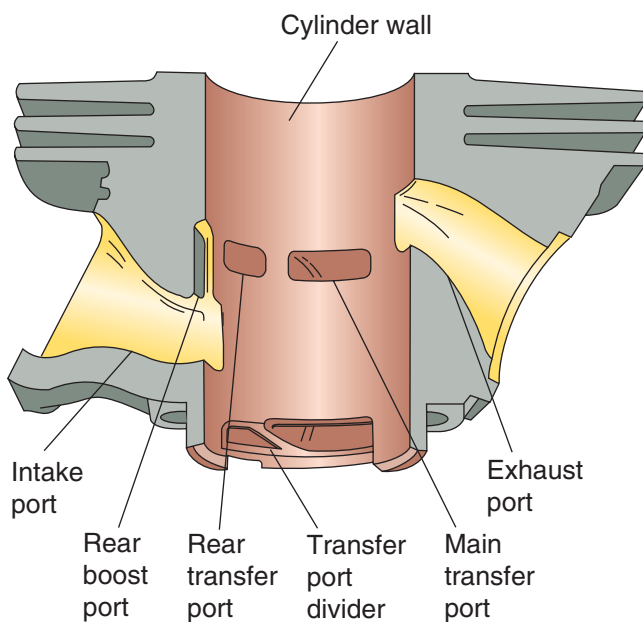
This cutaway view of a two-stroke cylinder shows its ports.
